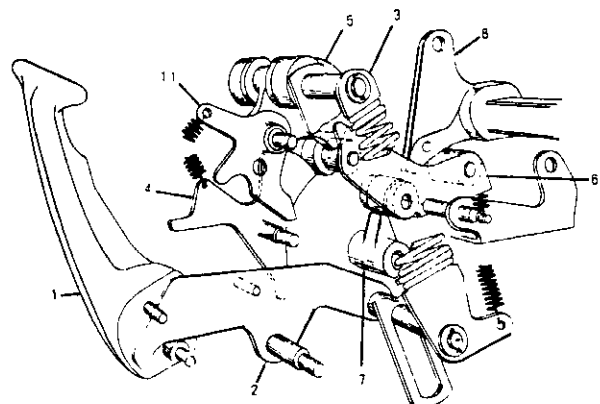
Mechanism ready to be charged by operator preparatory to closing of the circuit breaker contacts.
